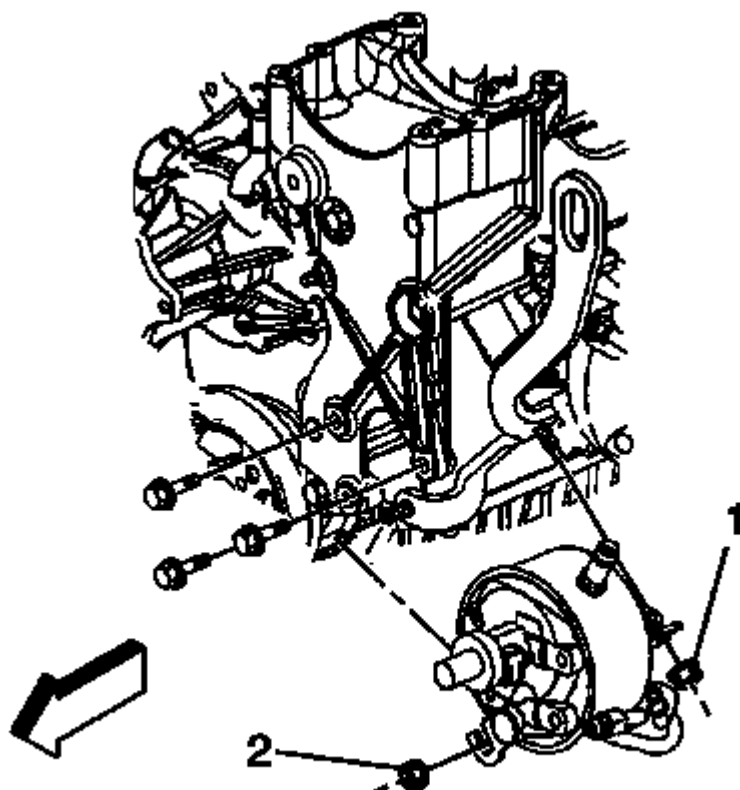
View Of Power Steering (P/S) Pump Rear Bracket Nut And P/S Pump Rear Bracket Front Nut
